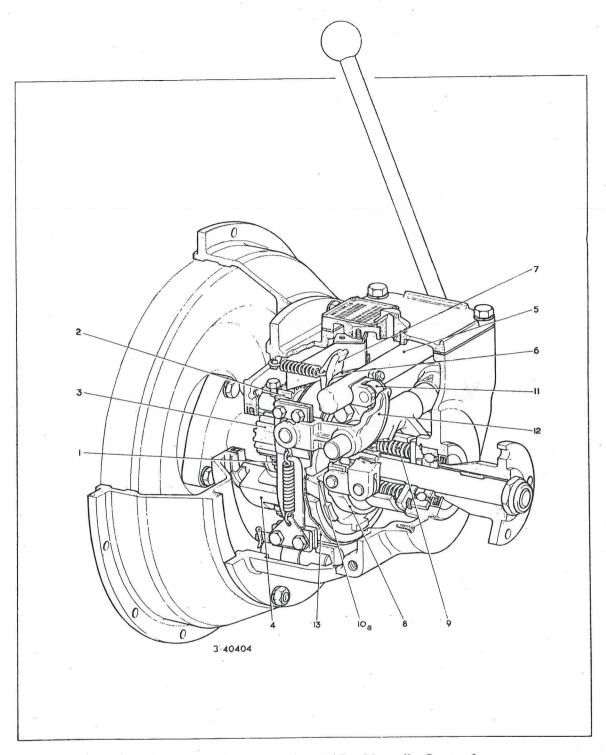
LISTER REVERSE GEAR—Manually Operated
